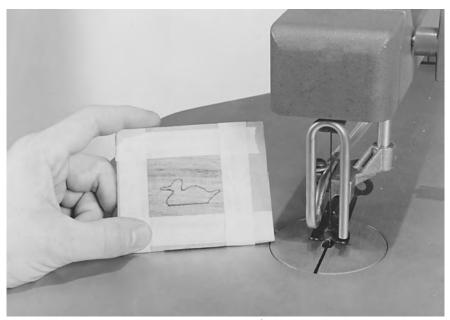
Tape veneer to cardboard or posterboard for added support and a cleaner cut.
